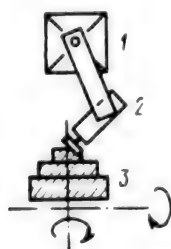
Layout for Trimming Castings by Industrial Robot
